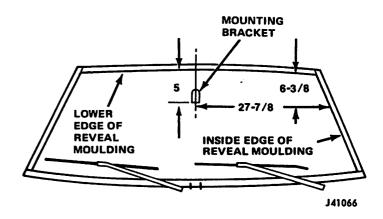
N-7 Windshield Mounted Rear View Mirror Bracket Location (Inches)—Cherokee-Wagoneer-Truck Models
